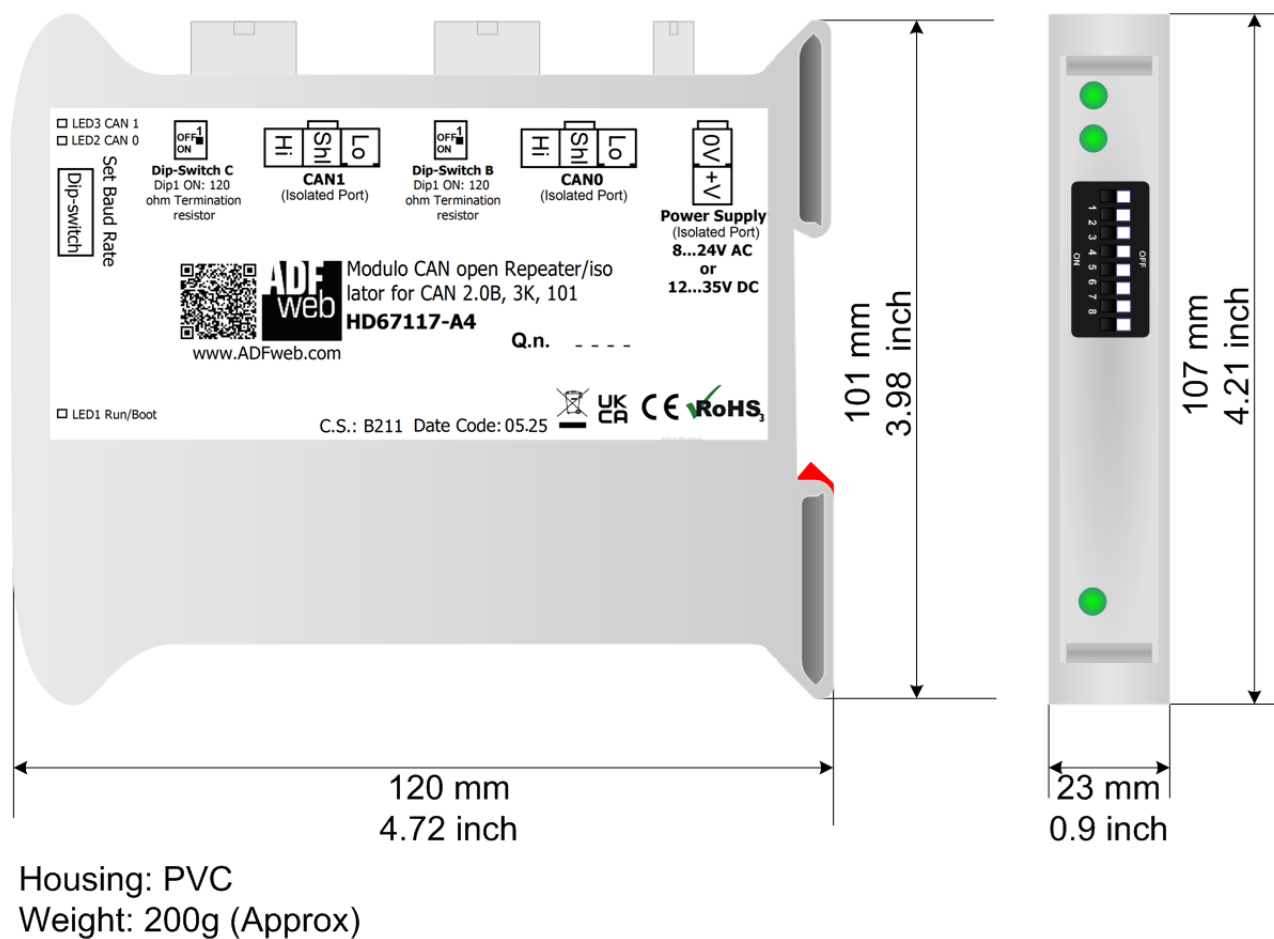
Mechanical dimensions scheme for HD671xx-A4
